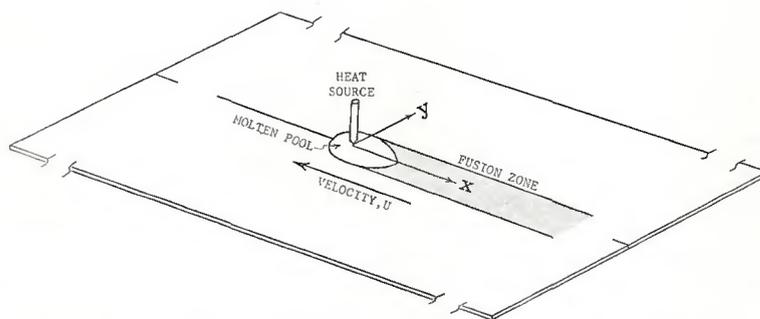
The schematic illustration of a pair of thin plates being butt welded with a heat source of constant velocity U
